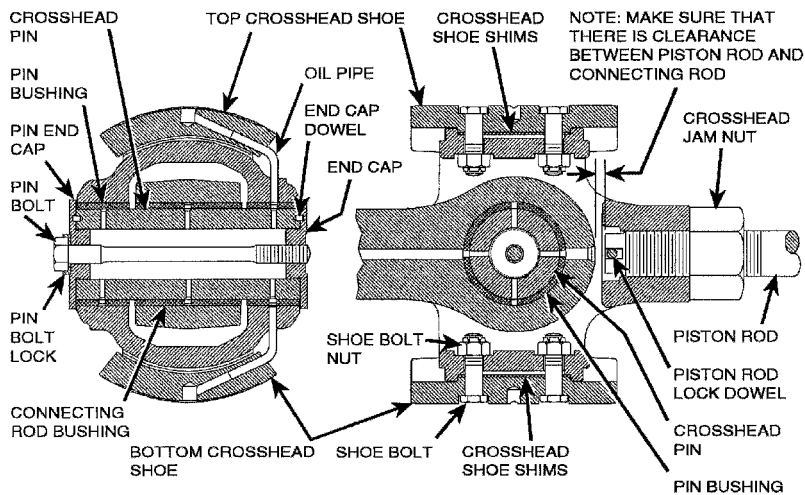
Cross-sectional views of crosshead components. (*Dresser-Rand Company, Painted Post, N.Y.*)
